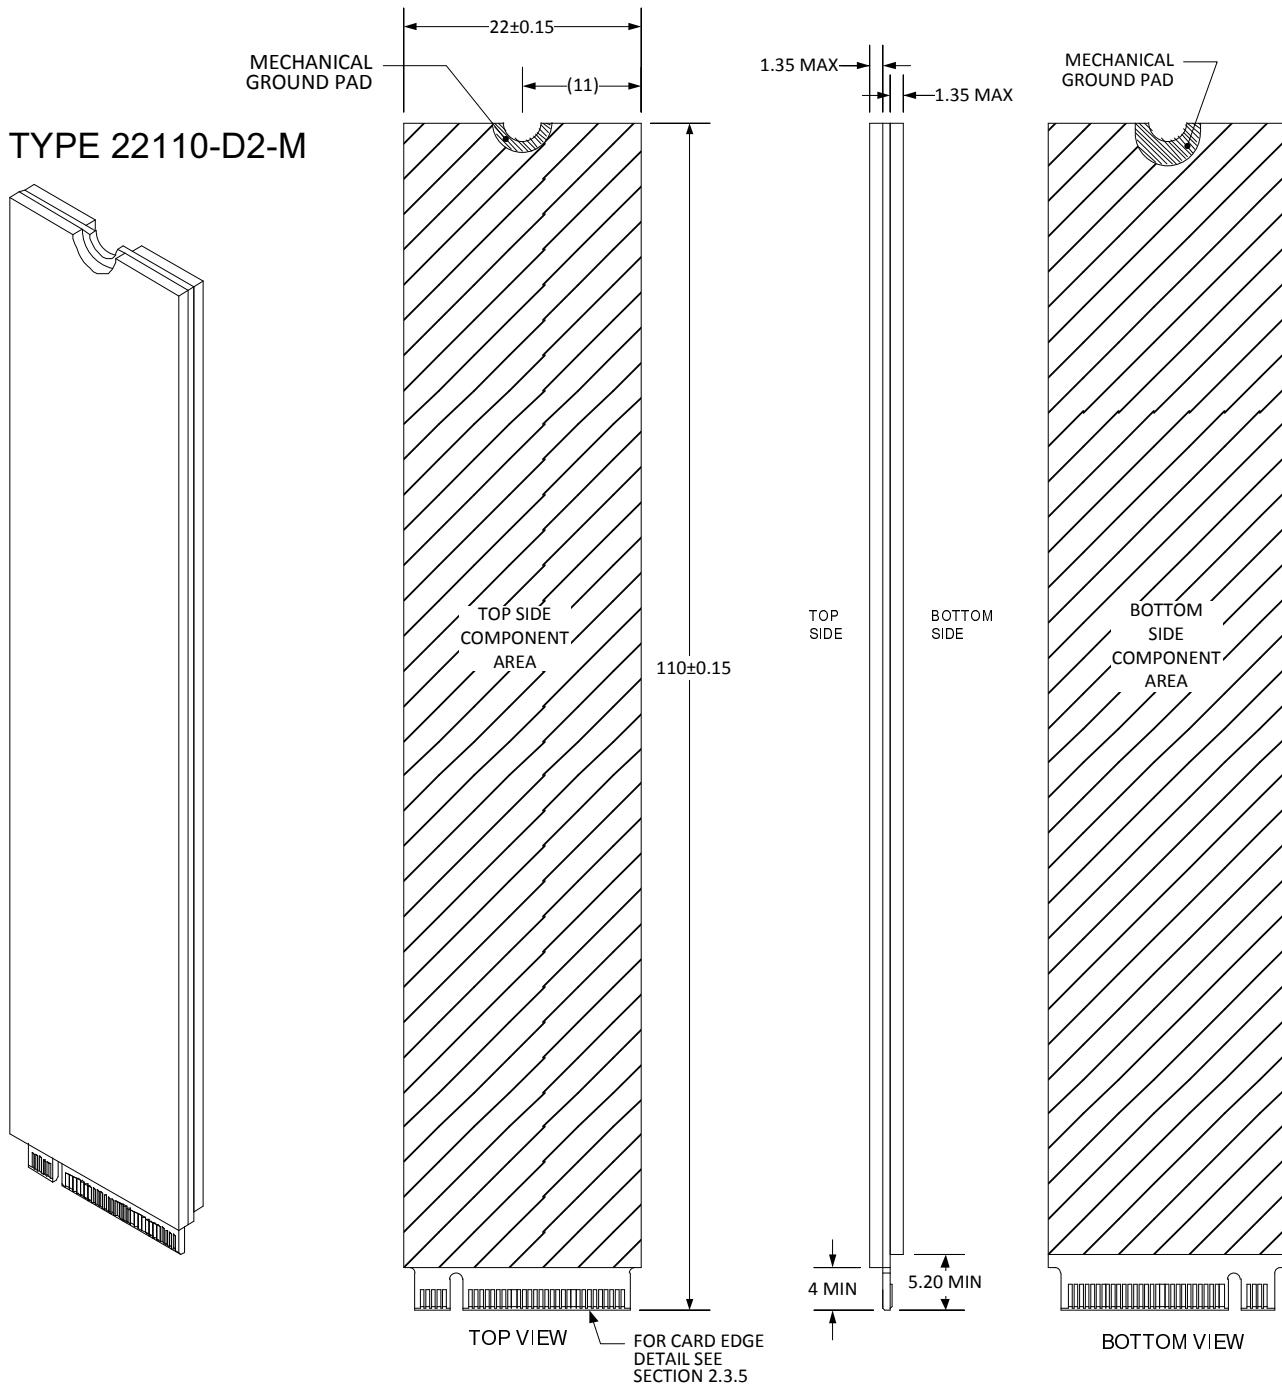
M.2 Type 22110 Mechanical Outline Drawing Example
